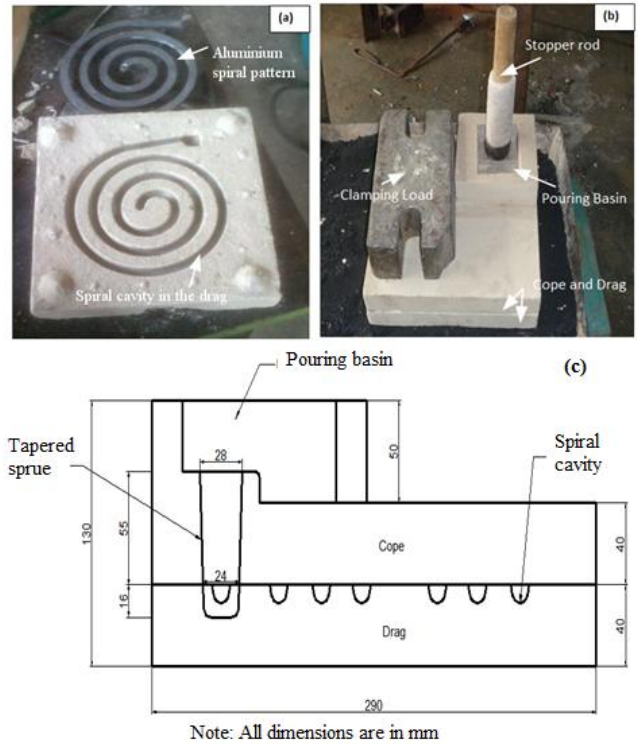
(a) The spiral pattern and the mould (b) complete set-up of the spiral fluidity mould (c) The sectional view of the fluidity set-up
